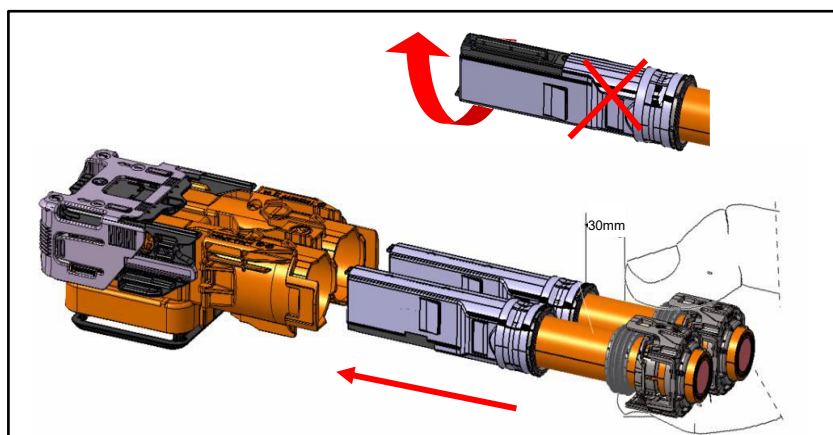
Mating of the Harness into the housing with open secondary lock
